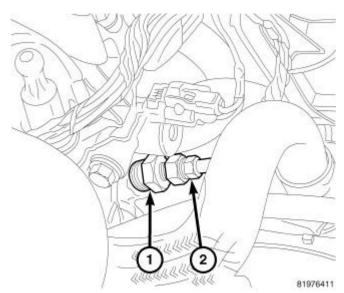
Oil Pressure Gauge & Adapter Courtesy of CHRYSLER GROUP, LLC
